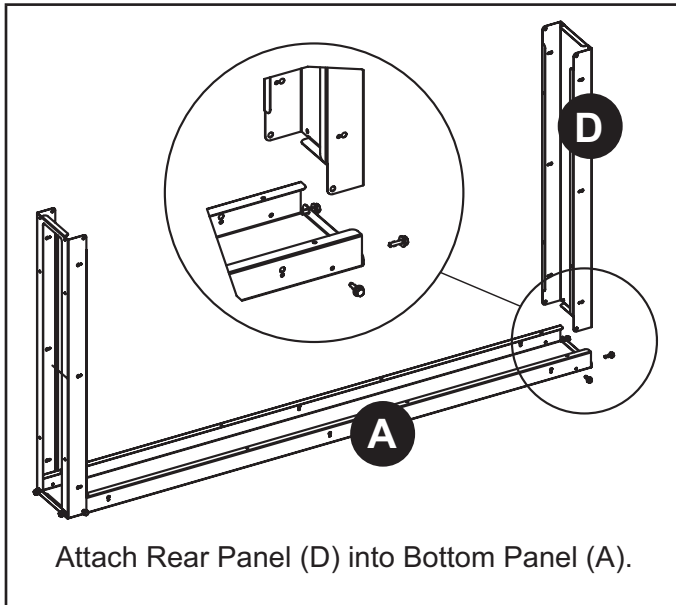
Assemble Rear Panel (D) to Bottom Panel (A)
